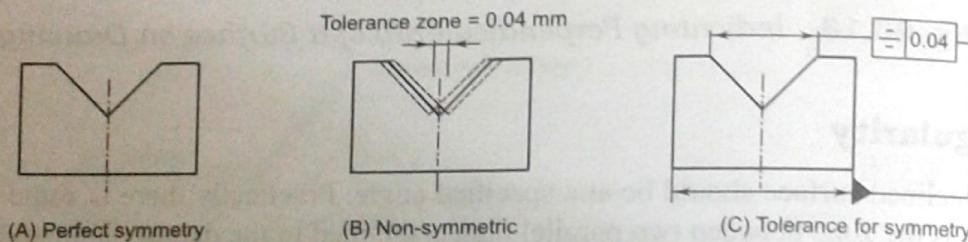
Indicating Tolerance for Symmetry on a Drawing
